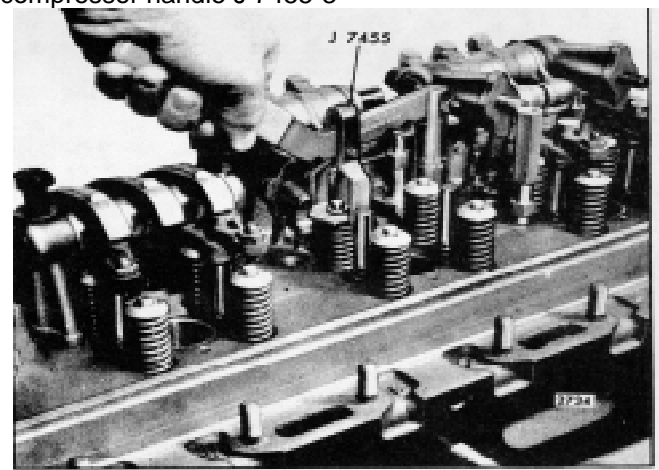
Removing Exhaust Valve Spring with Tool J 7455
